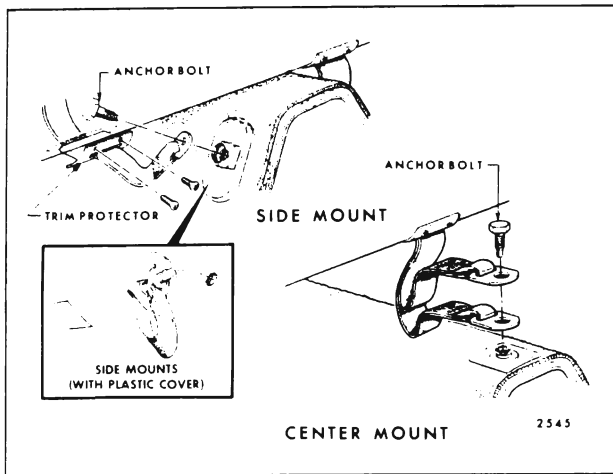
Seat Belt Inner Floor Mount Anchorage
